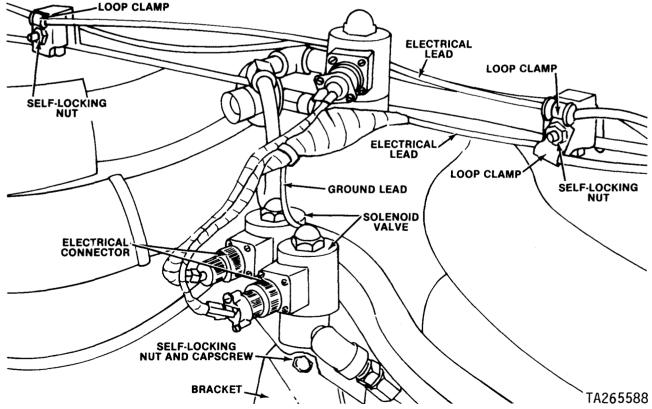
Removing or Installing Smoke and Dust Detector Electrical Cable
